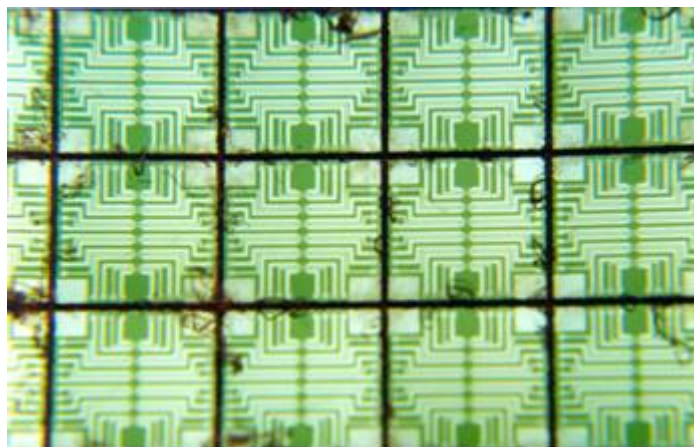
Final manufactured chips cut using a dicing saw.
